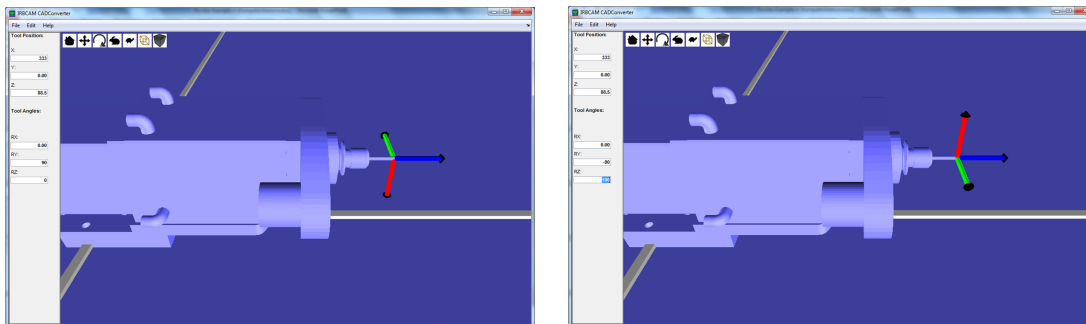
CAD Converter: Tool Definition on ABB/Kuka (Left) and Motoman (Right).
